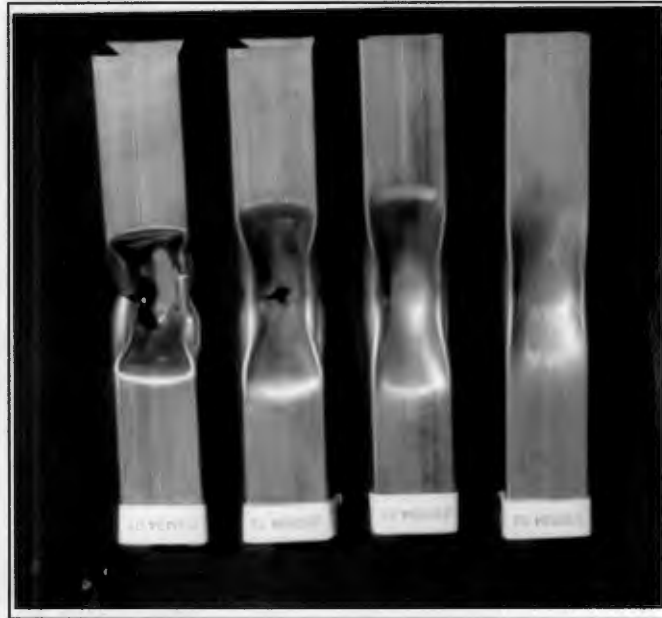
Photograph of tubes deformed by a strip of explosive
